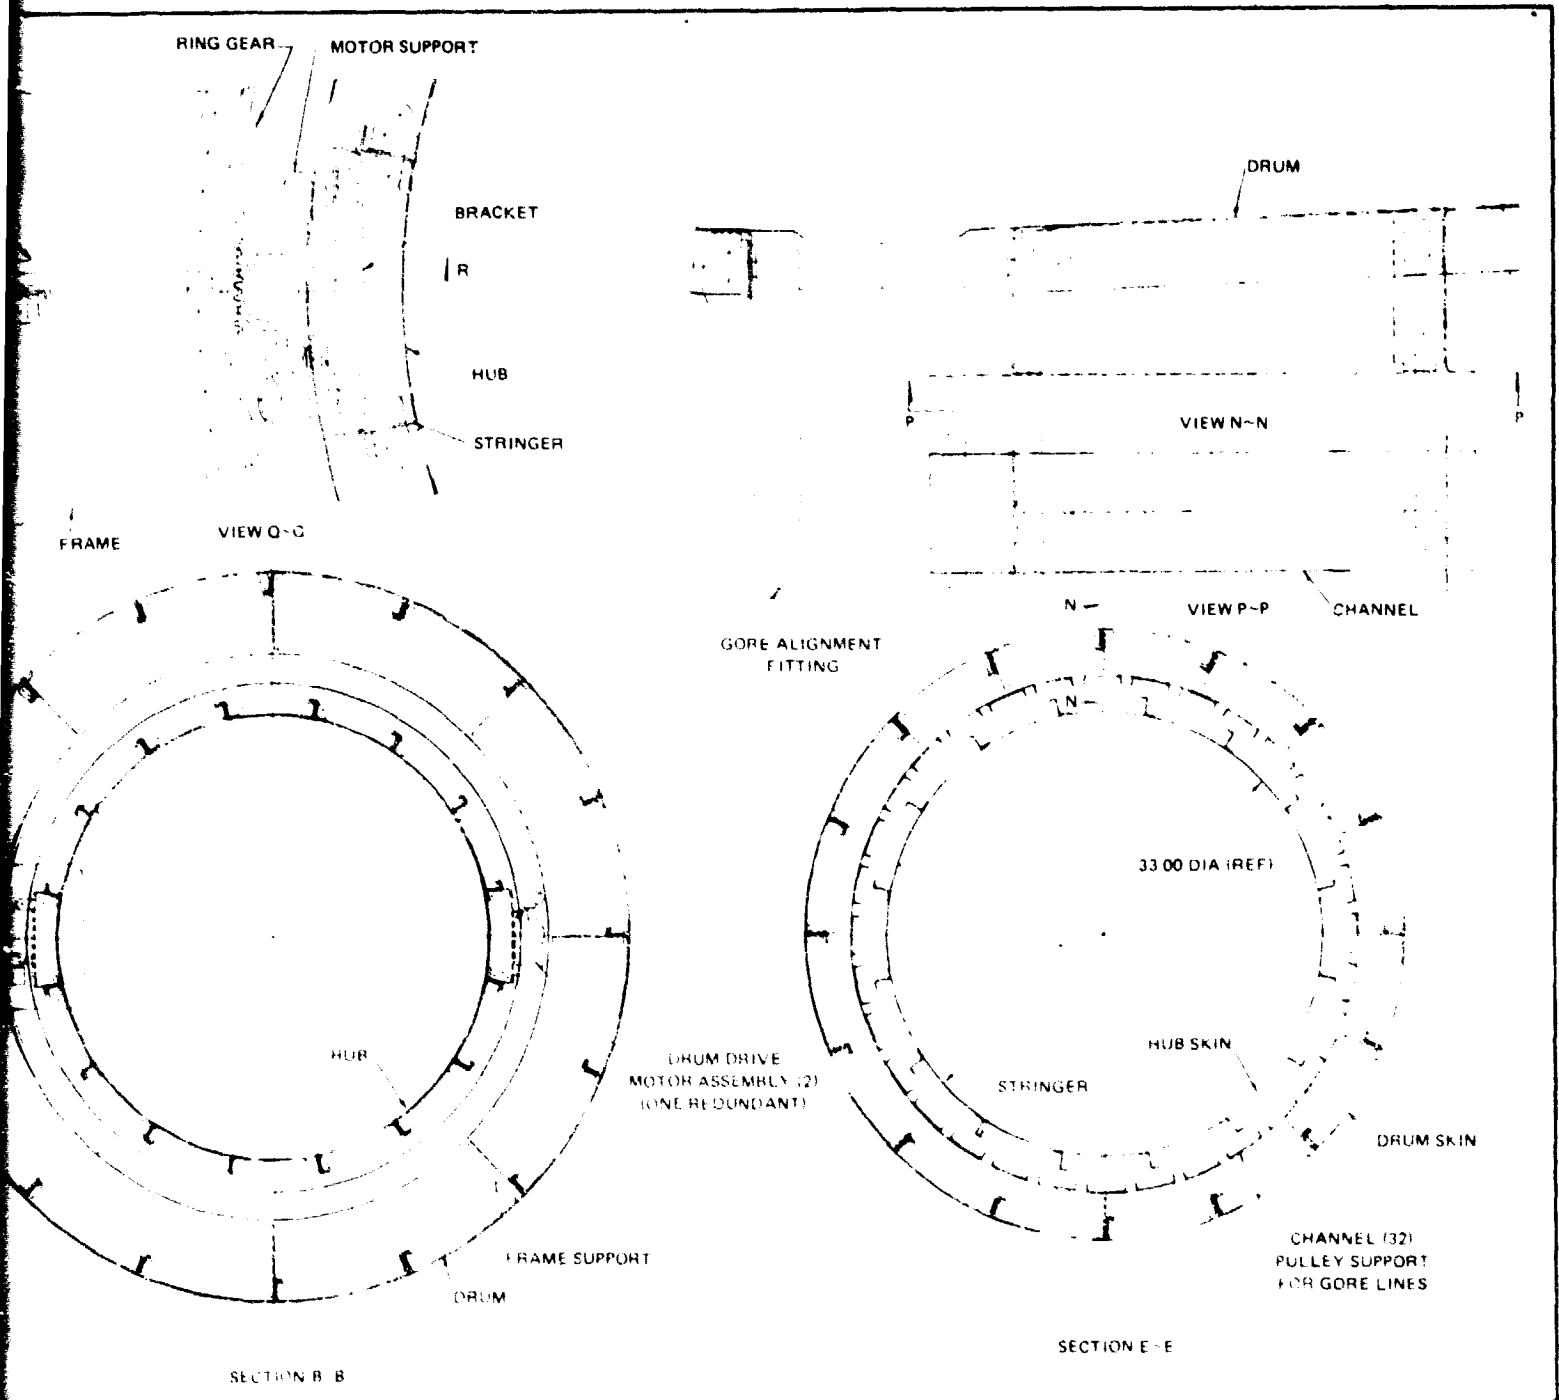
Hub & Drum Assemblies (Sheet 2 of 2)
